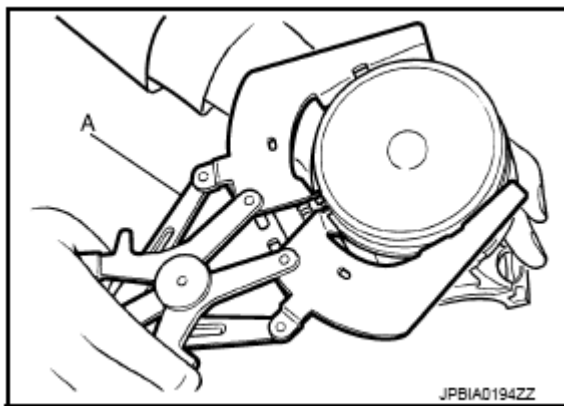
Installing Piston Rings Using Piston Ring Expander
